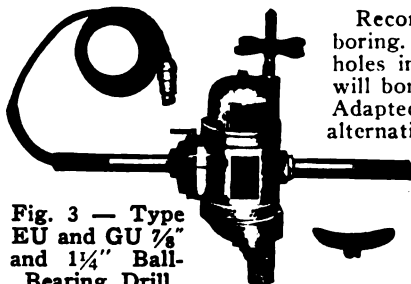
Type EU and GU 7/8" and 1 1/4" Ball-Bearing Drill
